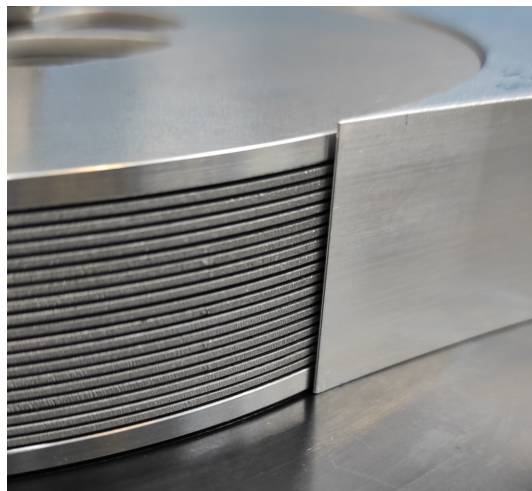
Closeup view of the clearances between the rotor, a nozzle segment and the mounting plate.
